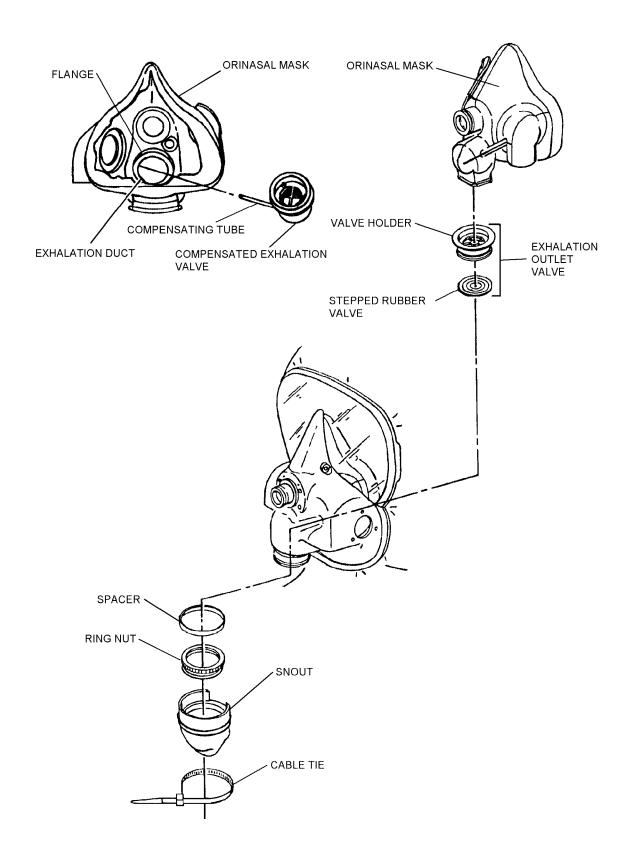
Compensated Exhalation Valve/Exhalation Outlet Valve/Snout
